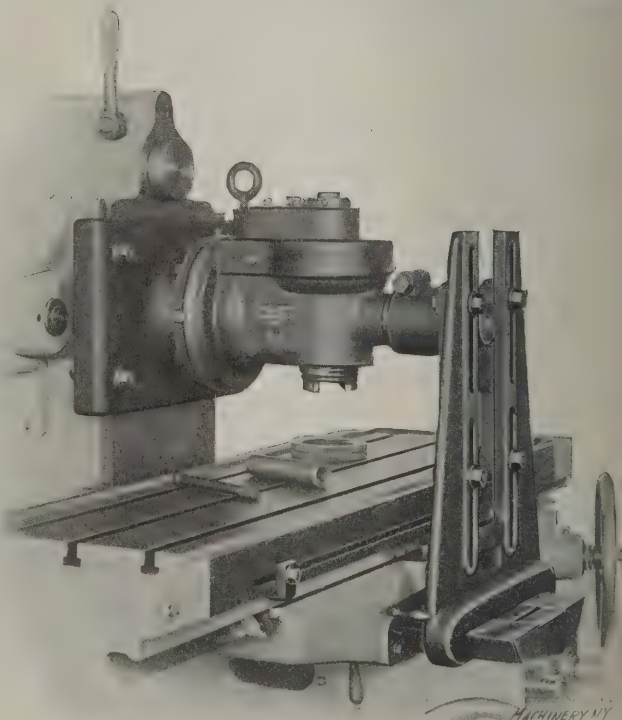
Vertical Attachment for New Design of Milling Machine.
